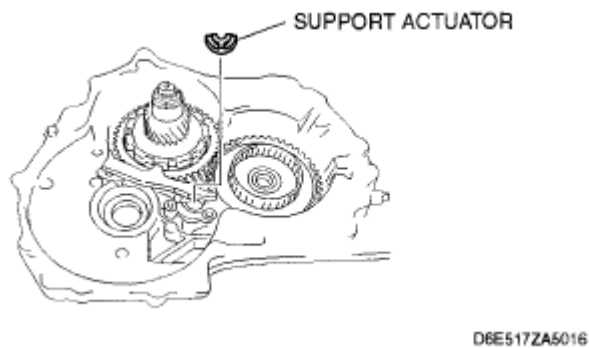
View Of Support Actuator Plate And Transaxle Case
